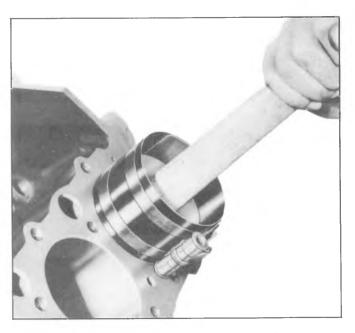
A-70--Installing Connecting Rod and Piston Assembly
